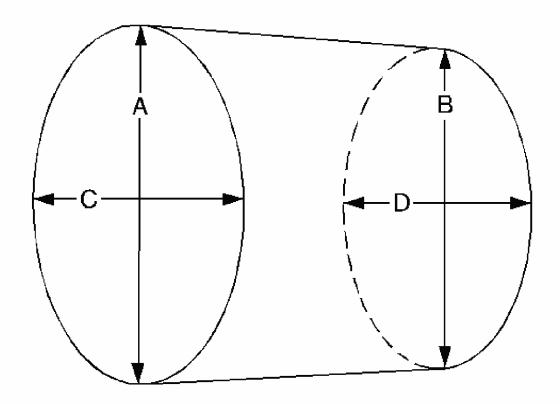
Identifying Out-Of-Round Measurements Courtesy of GENERAL MOTORS CORP.
